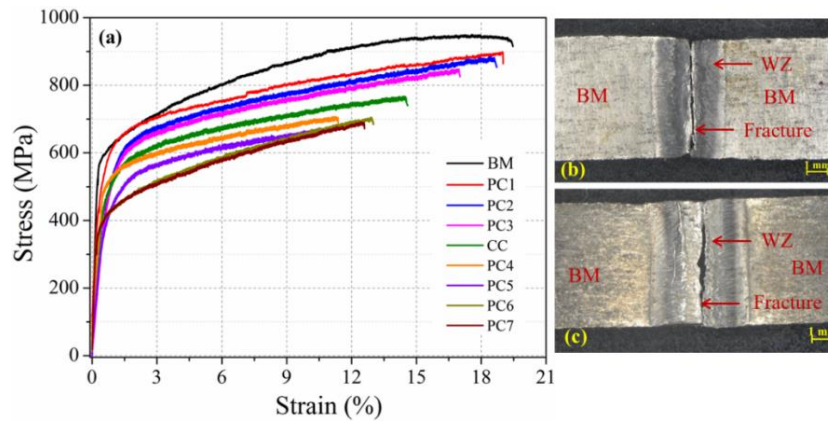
(a) Stress-strain curve of base material and welded joints; (b, c) showing fracture location of CC (b) and PC5 (c) welding condition
